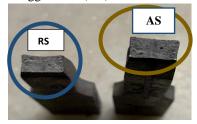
Fracture of MX-TRIVEX tensile specimen at 1000 rpm
